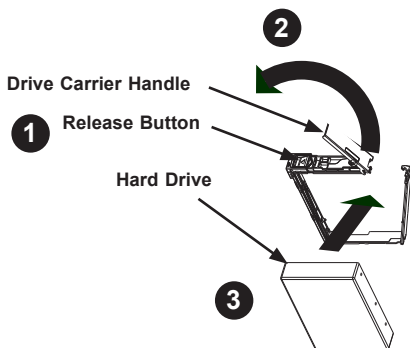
Installing a 3.5" Hard Drive into the Hard Drive Carrier
